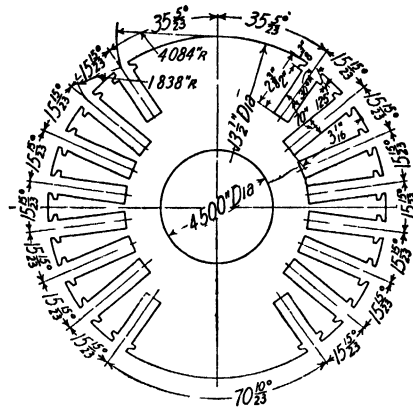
Rotor-punching, 375-kva, 3600-r.p.m. turbine generator.
